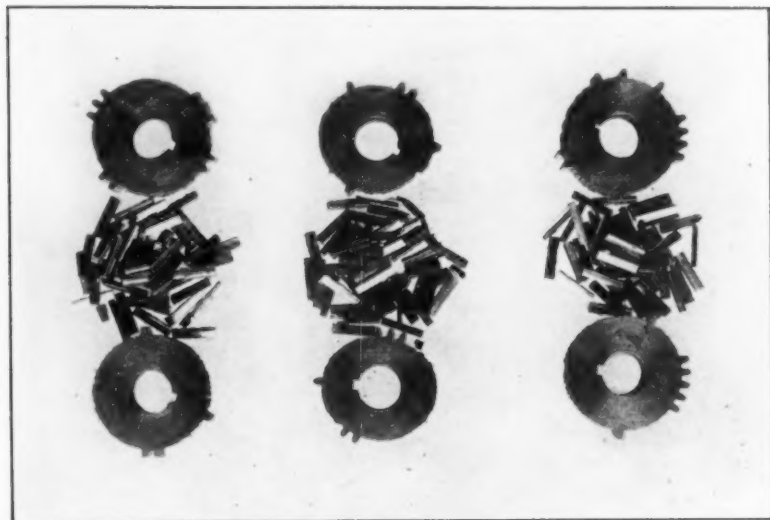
30 TOOTH ENGAGING 30 TOOTH, TESTS 42—44 INCLUSIVE, SERIES 2
